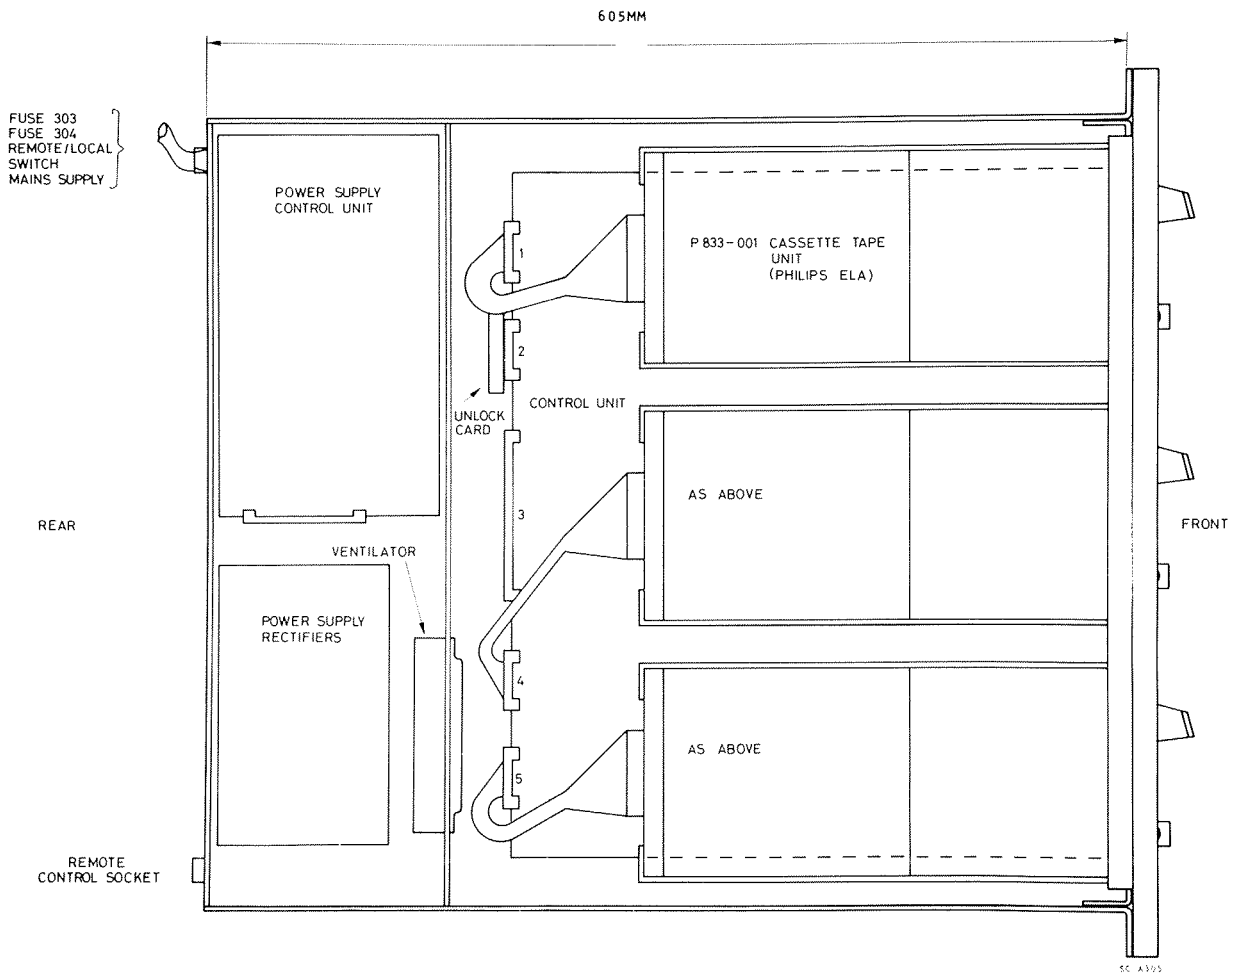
CASSETTE TAPE CHASSIS LAYOUT (P833-152 EQUIPMENT SHELVES)
